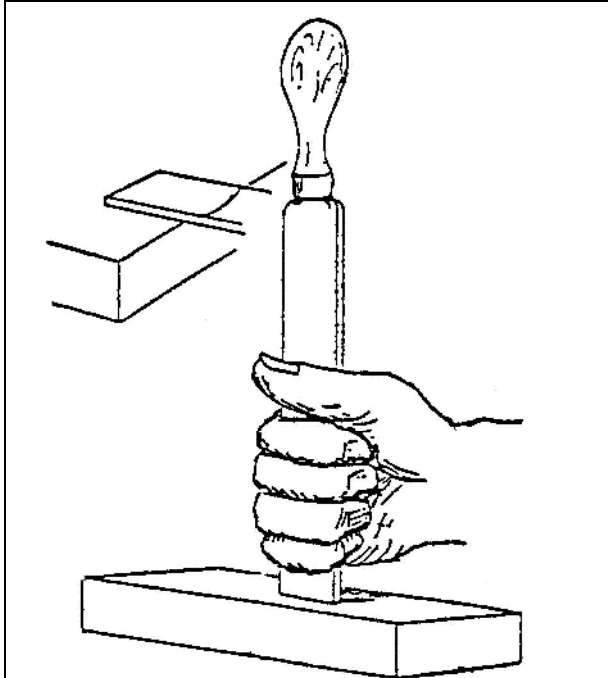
Scrapers should be stoned frequently when in use. Hold the tool square with the face of the stone bearing down lightly. Too much pressure will scratch the stone and injure the cutting edge of the scraper.
